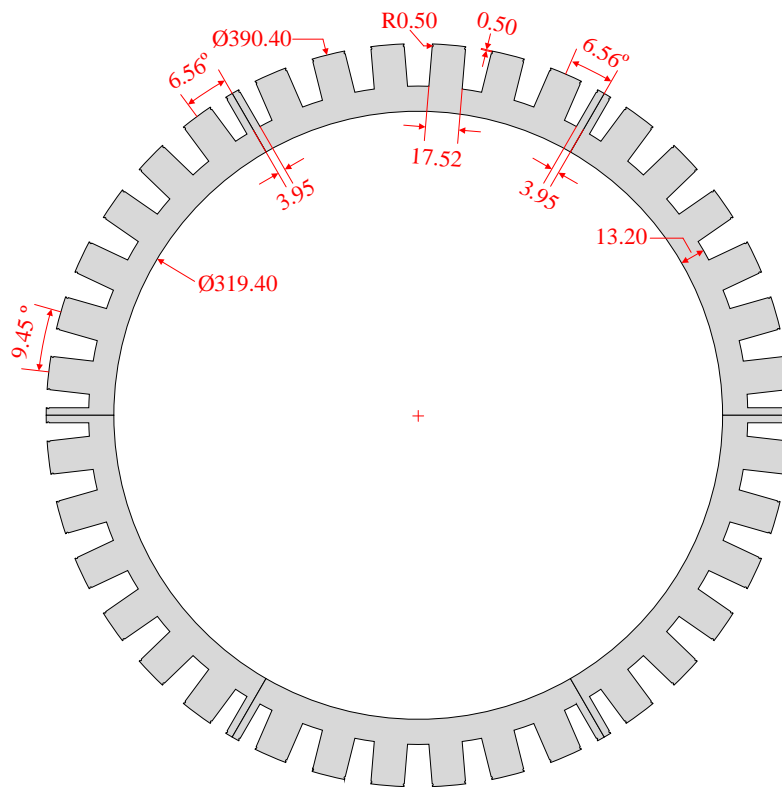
Stator of 42S/32P Prototyped Machine.
